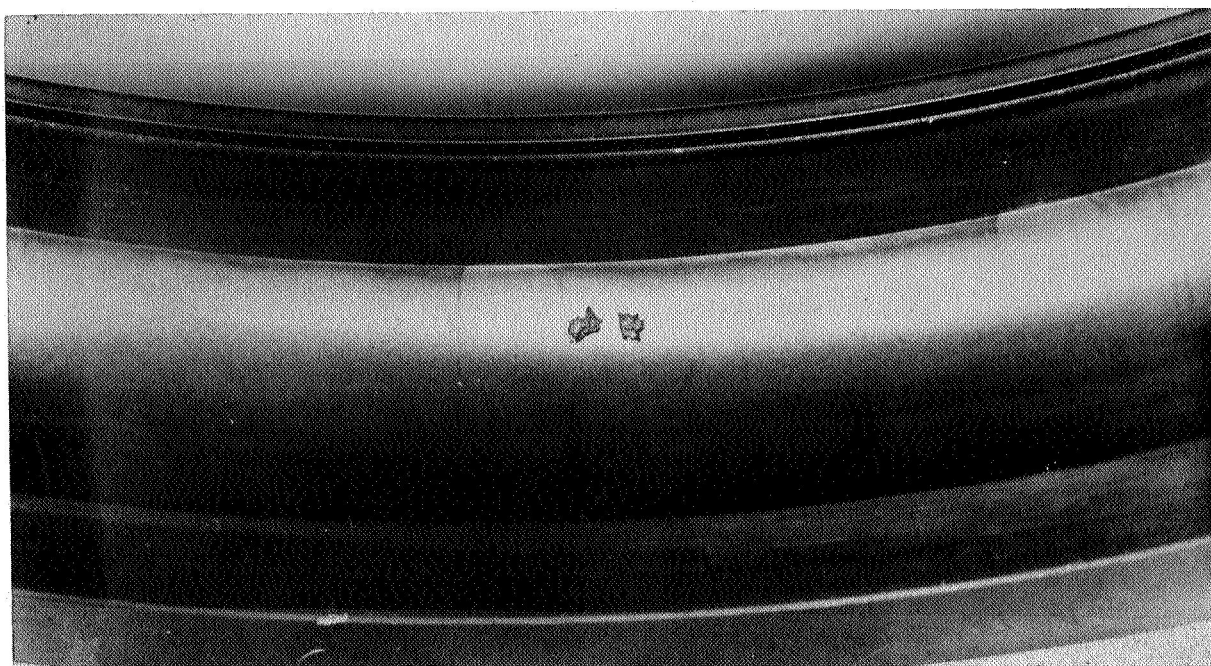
TYPICAL FAILURE IN BALL PATH IN OUTER RING - BEARING S/N 40
